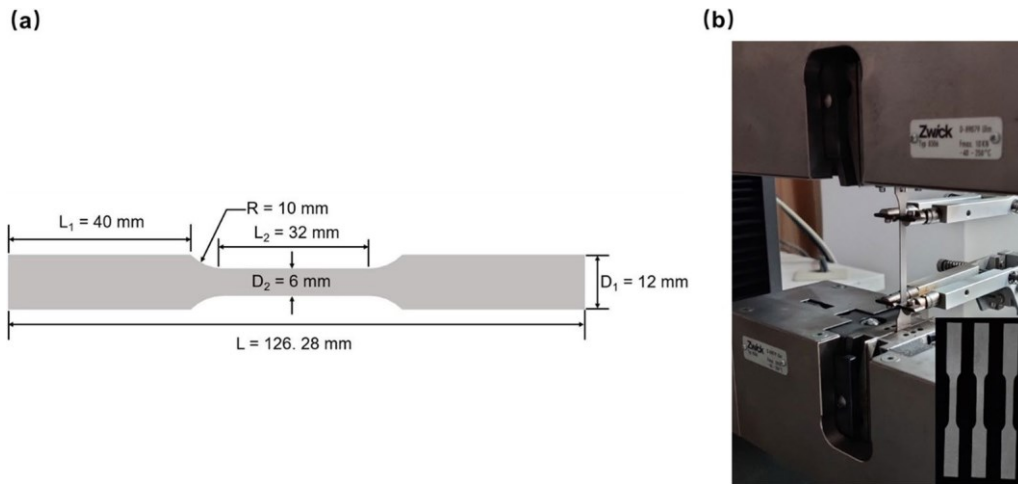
a The specimen dimensions and b tensile strength testing of stainless steel samples
